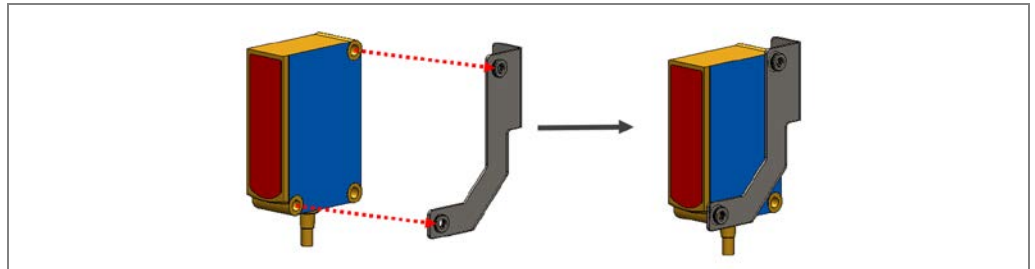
Steel frame: mounting the photoelectric sensor on the mounting bracket
